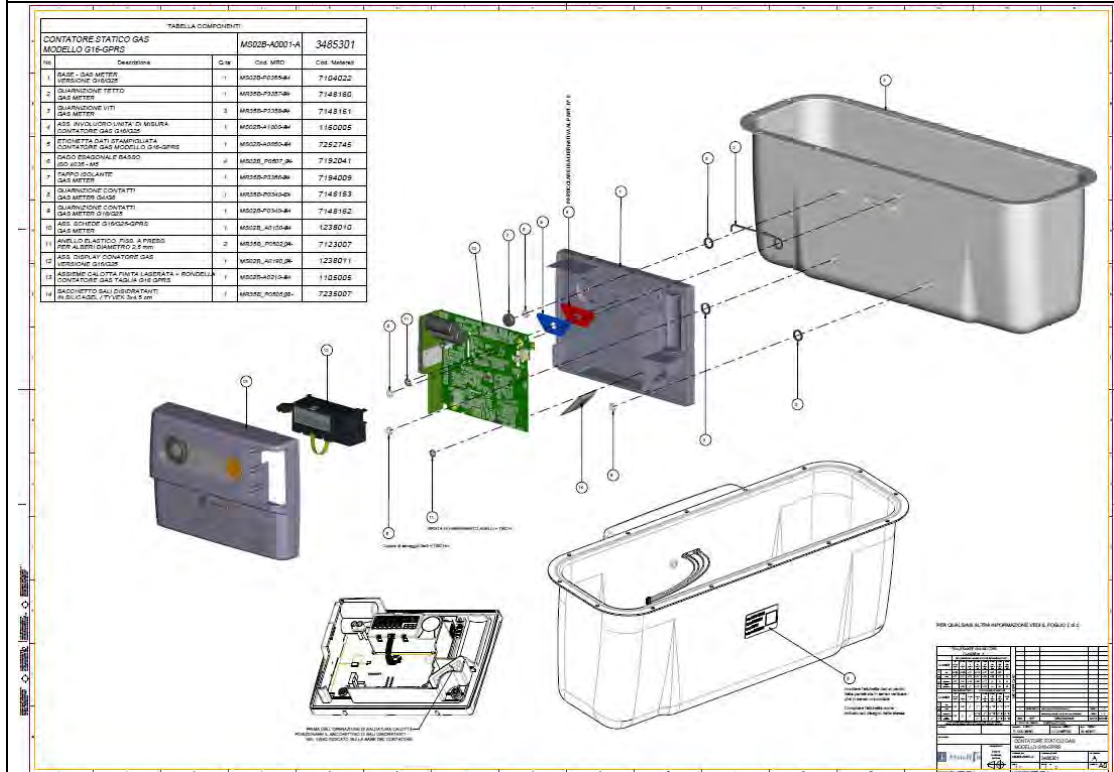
EXPLODED DRAWING OF PLASTICS AND ELECTRONICS
